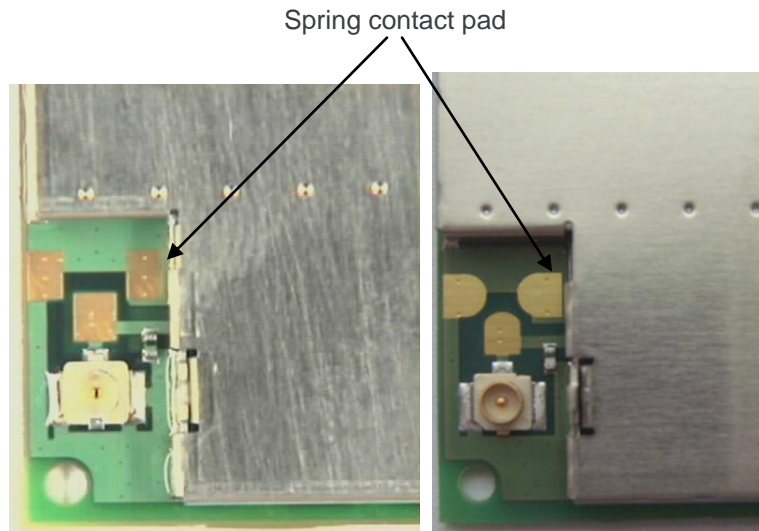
Assembly process – spring contact connector on Q2686 and Q2687
